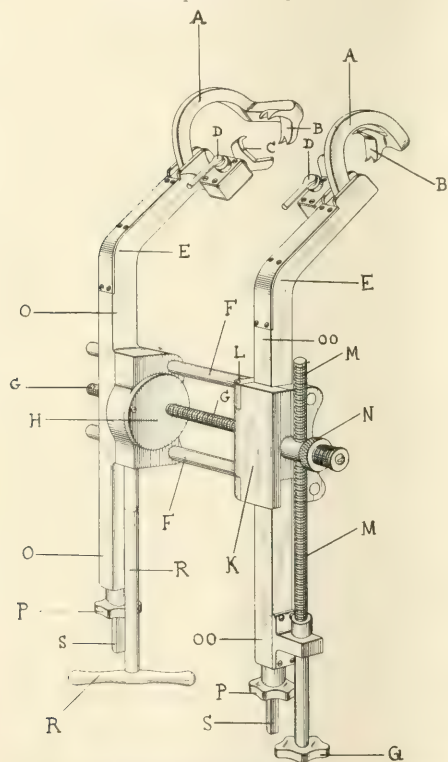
Details of motor bone clamp (hand driven). A, curvature of jaw permitting the clamping of fractured bones from the top, without the loosening of all tissues; B, rigid claw; C, movable claw in swivel ball joint; D, level to lock movable claw in place; E, angle of guides O and OO, the Albee motor works freely between the jaws, as the angle of the jaws is with the axis of the motor; F, screw threaded through handle which guides O travels; G, screw threaded rod, running through gear box H, transmitting the driving power from handle R; H, transmission gear box made from noncorrosive metal, thus allowing sterilization by boiling; I, cover of gear box; J, screw covered by plastic plate, preventing the loosening knurled screw; K, hinge on split box; L, hinge on split box; M, screw threaded rod set in motion by turning thumb nut Q, controlling the longitudinal movement of guide OO; N, thumb nut controlling the transverse movement of the guide OO; O, thumb nut controlling the opening and closing of claws B and C; Q, thumb nut moving the driving rod through the gear box; R, removable handle of the motor; S, extensions of thumb screws P. This handle is used for final tightening of thumb screws P by inserting the handle in S; S, extensions of thumb screws P.
